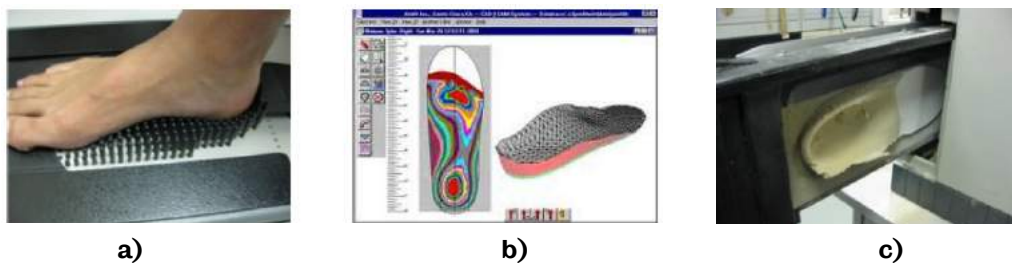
Foot plantar surface profile measurement device (a), O&P CAD software (b) and CNC machine (c) [62]
